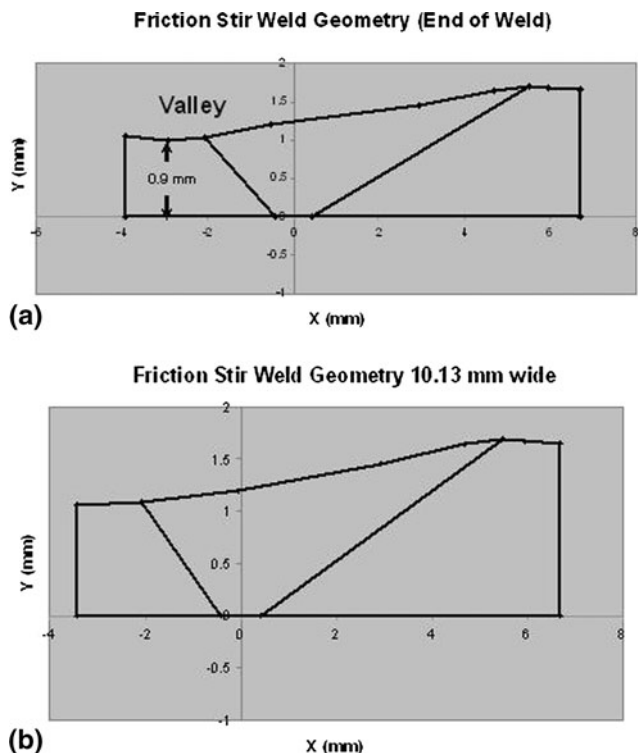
(a) Weld geometry—end of weld (note the valley) and (b) start of the weld
